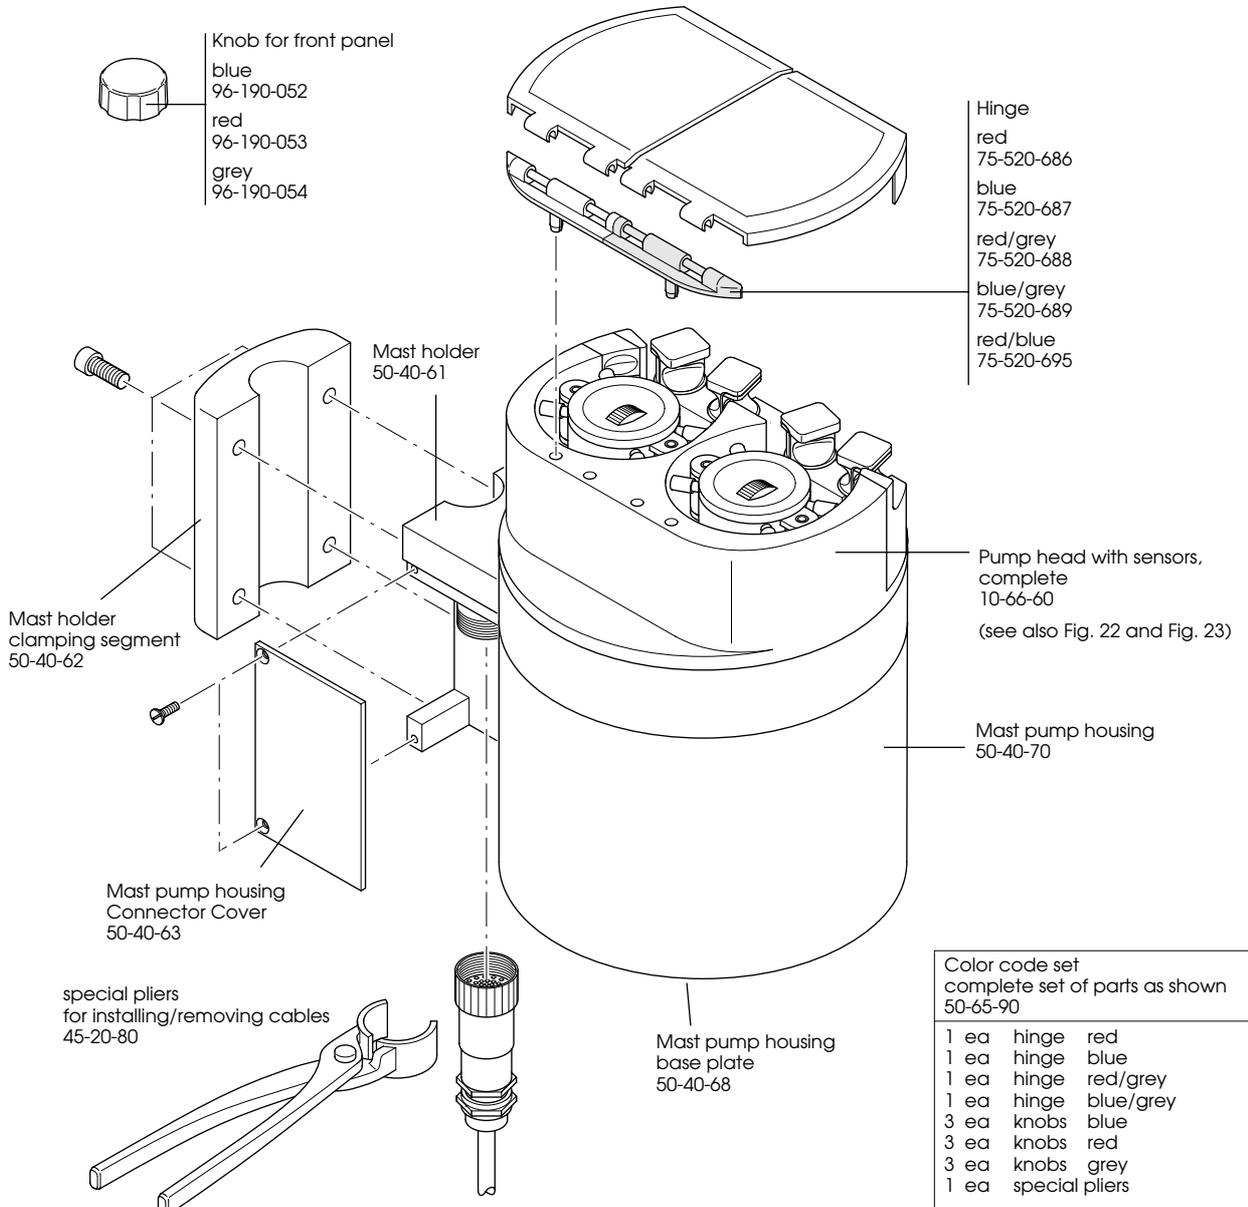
Double Head Pump: Spare parts of mast-mounted double head pump (1)
